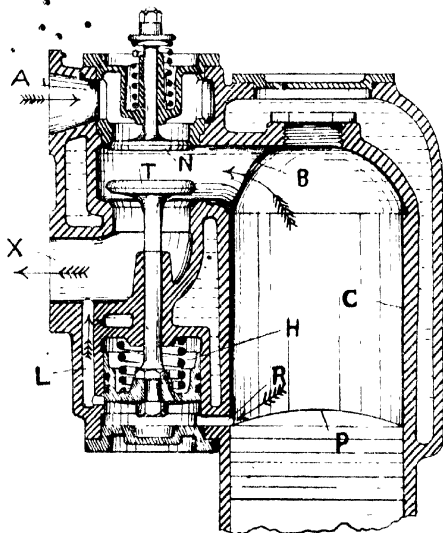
Four-stroke motor with automatic admission and exhaust valves.
